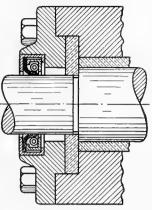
When grease is used as a lubricant, it is sometimes desirable to assemble a single seal to keep dirt from reaching the bearing rather than retain the grease in the bearing. The illustration shows an installation wherein a right-hand spiral groove is cut in the bearing bore to lead the lubricant outward. Surplus grease is forced past the seal, thereby keeping the bearing clean.
